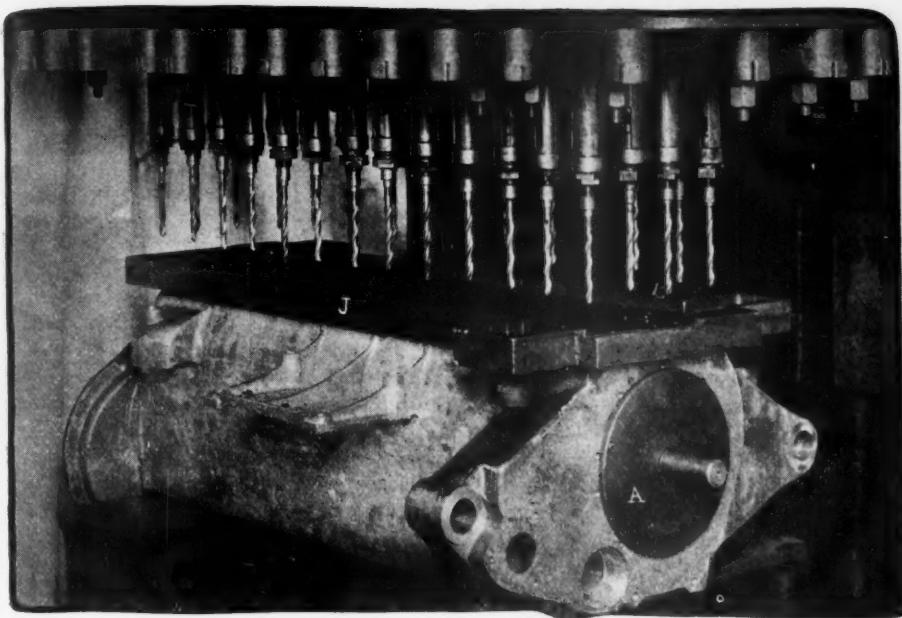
Multiple drill used for drilling twenty-nine holes in the base of the crankcase
